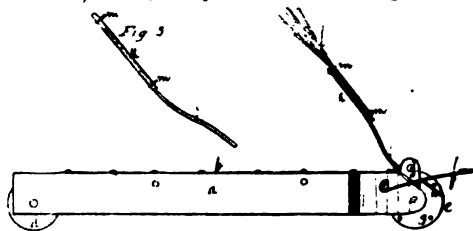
EWING BRUSHING-MACHINE: Side view.
